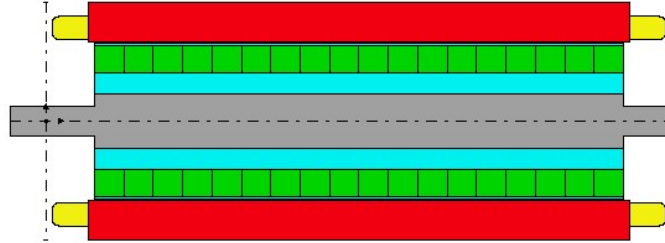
Axial view of the virtual prototype of the developed radial flux machine model
